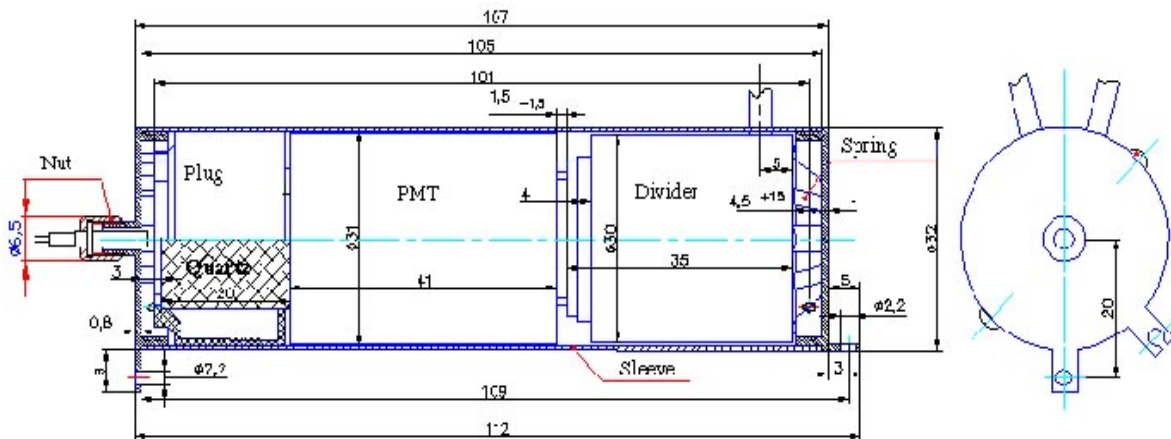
Side view of the parts of FEU-187 assembled in the tube (left). Rear view of the tube (right) [32].
